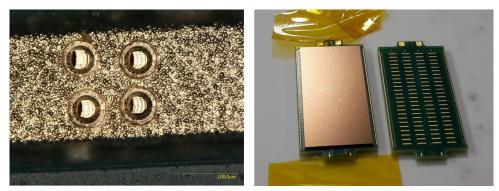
Left: Microscope image of four redundant gold bumps on the interposer PCB's metal pad. Right: Interposer PCBs with and without bump-bonded LGAD sensor.
